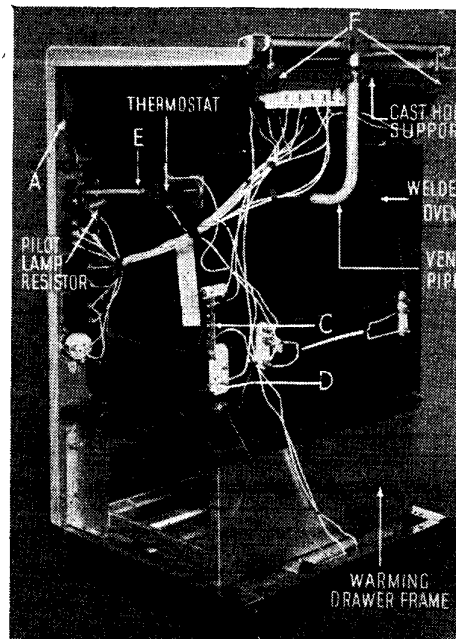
With side and rear panels removed, all wiring is exposed. Note the oven vent pipe which discharges through small ports in front of splash-plate
